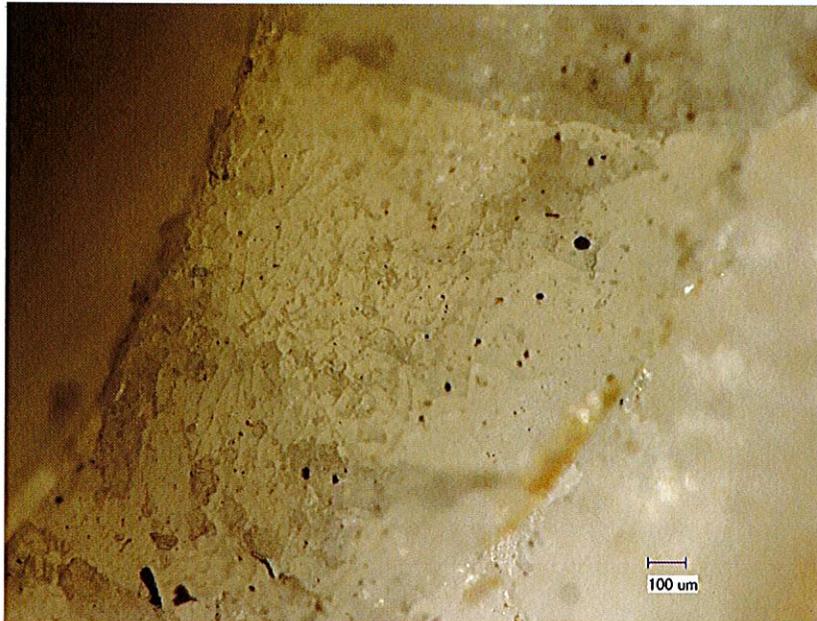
Mud Cracking on Fracture Surface Visible When Backlit.
